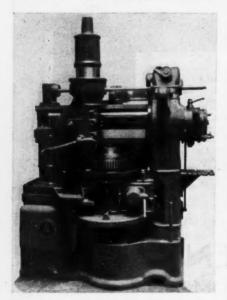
Front view of Fellows 64A type Gear Shaper with 5 in. stroke saddle and new type apron.
